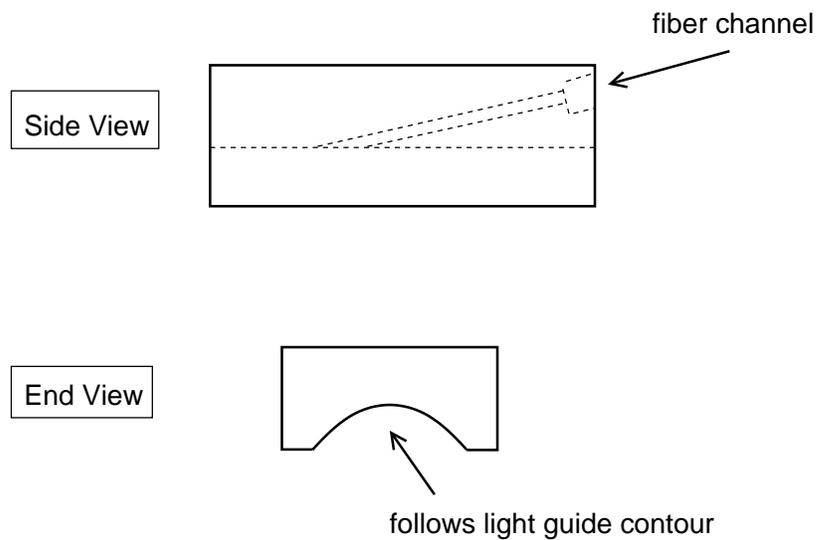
View of a representation of a generic fiber mounting block showing a side and an end view.
